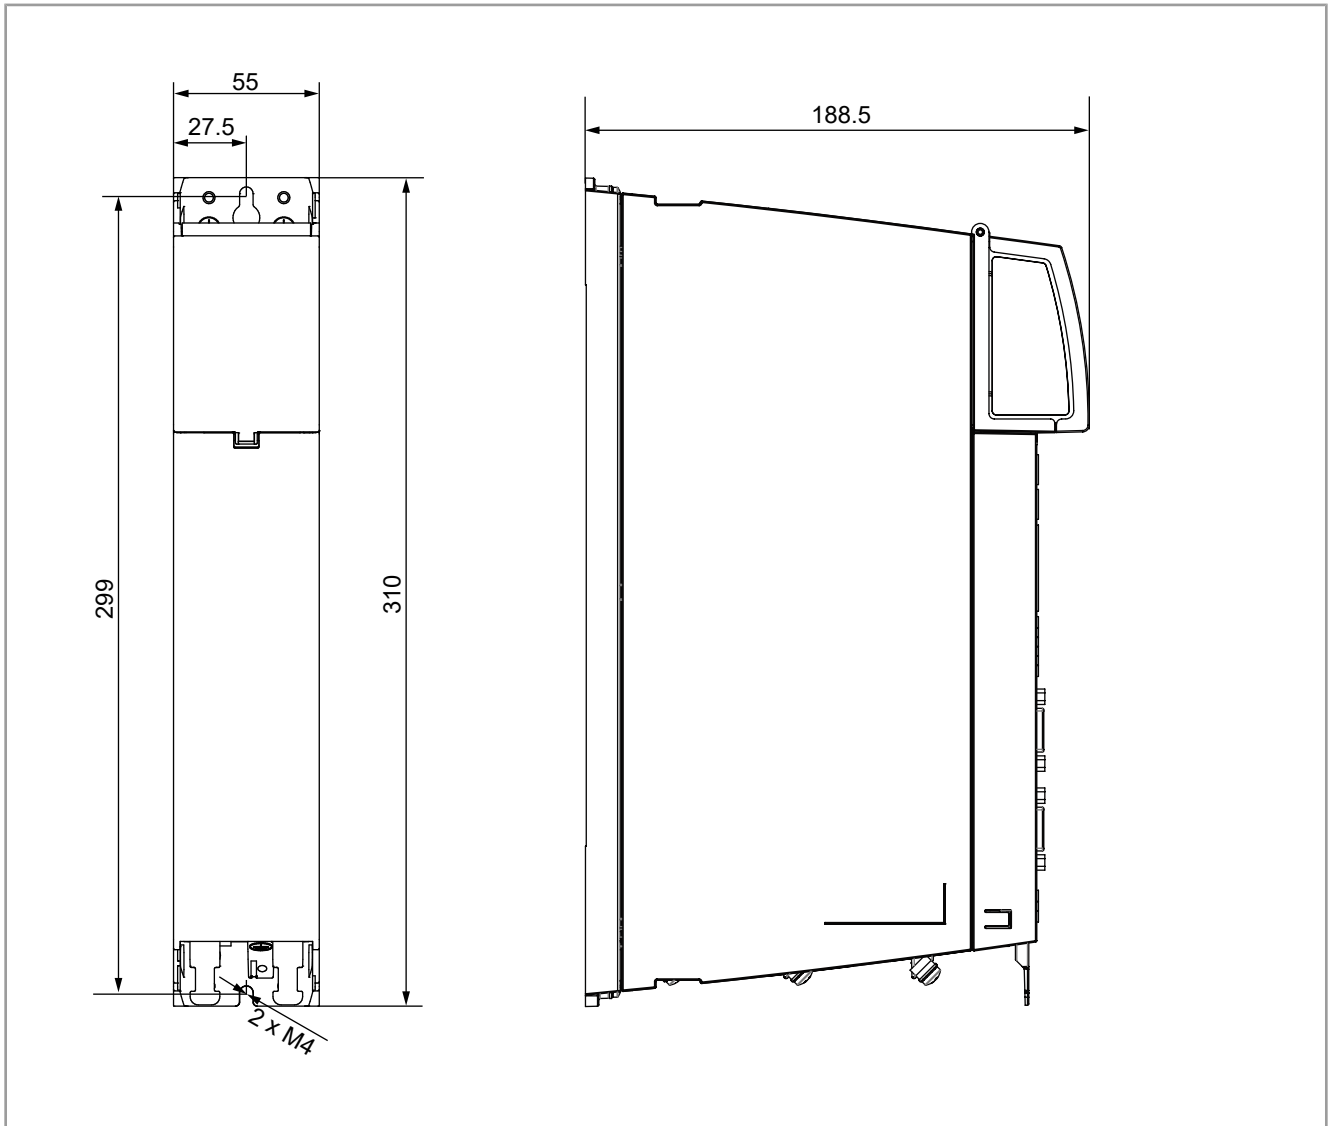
Dimensions of BG1 in mm, Cold Plate mounting
